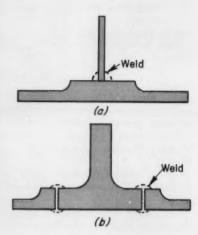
Raised lands are used to accommodate welded joints in assemblies of chemically milled parts.
